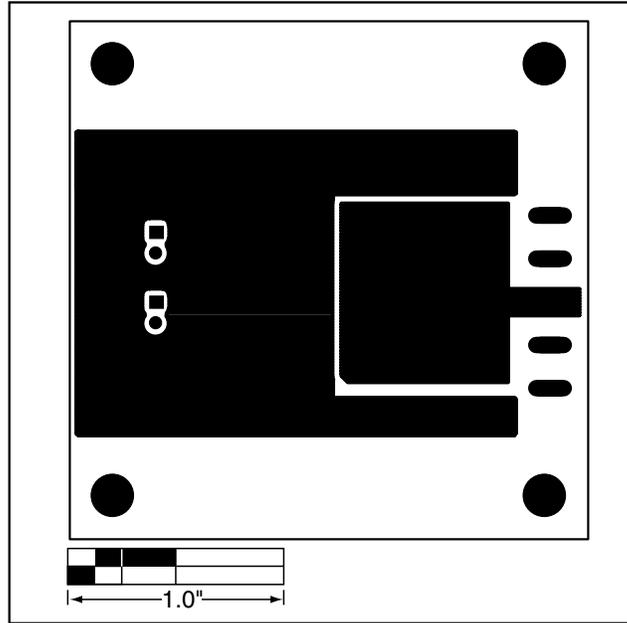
MAX1817 EV Kit PC Board Layout—Solder Side
